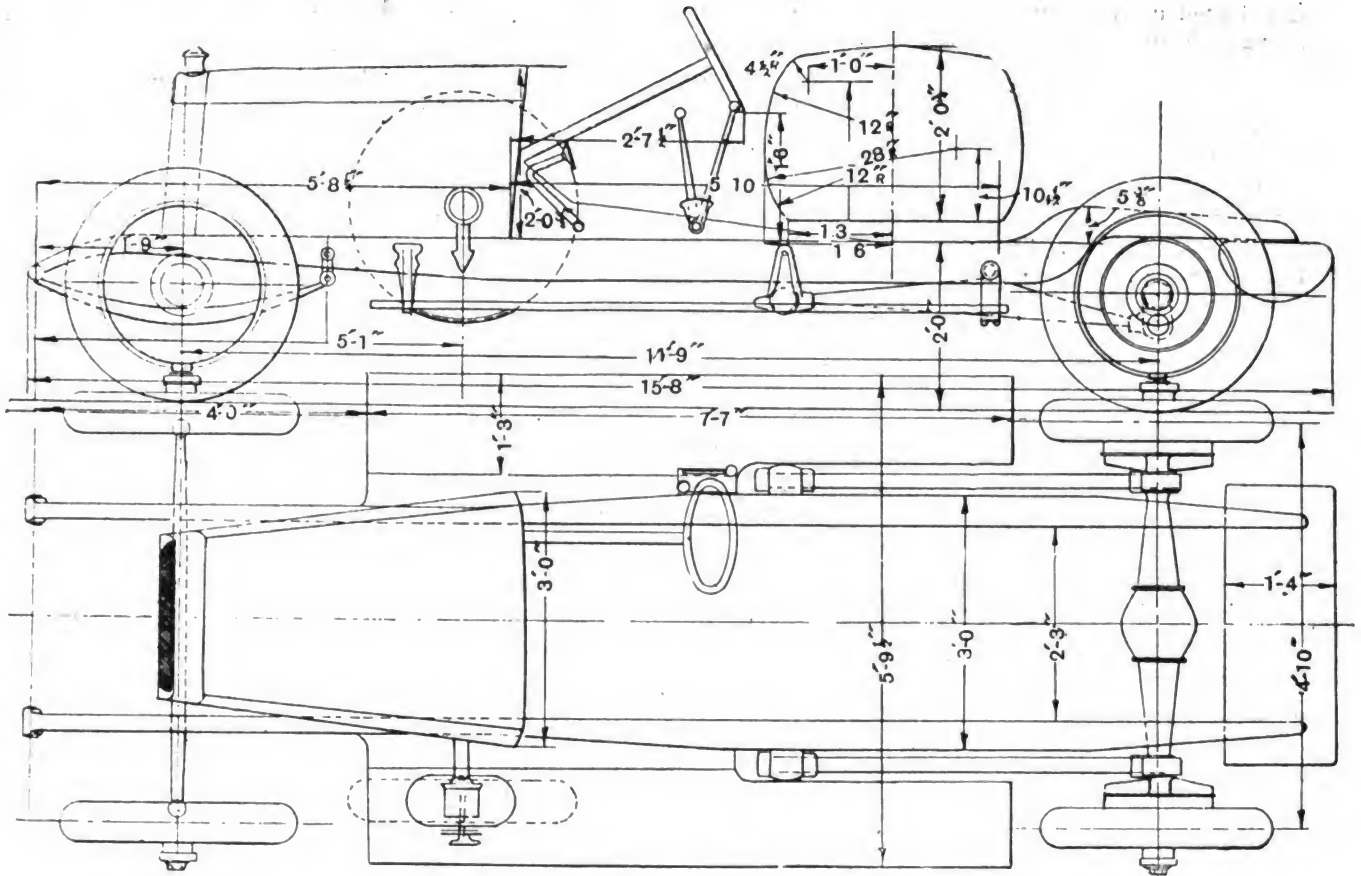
Body builder's drawing of Lanchester 40 h.p. six-cylinder post-war chassis, giving dimensions needed to build bodies.
